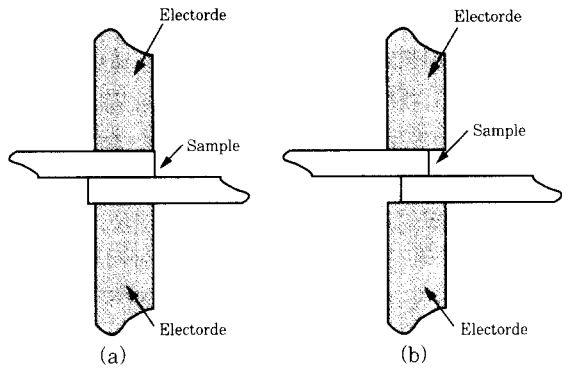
Overlap seam (a) welding and mash seam (b) welding
